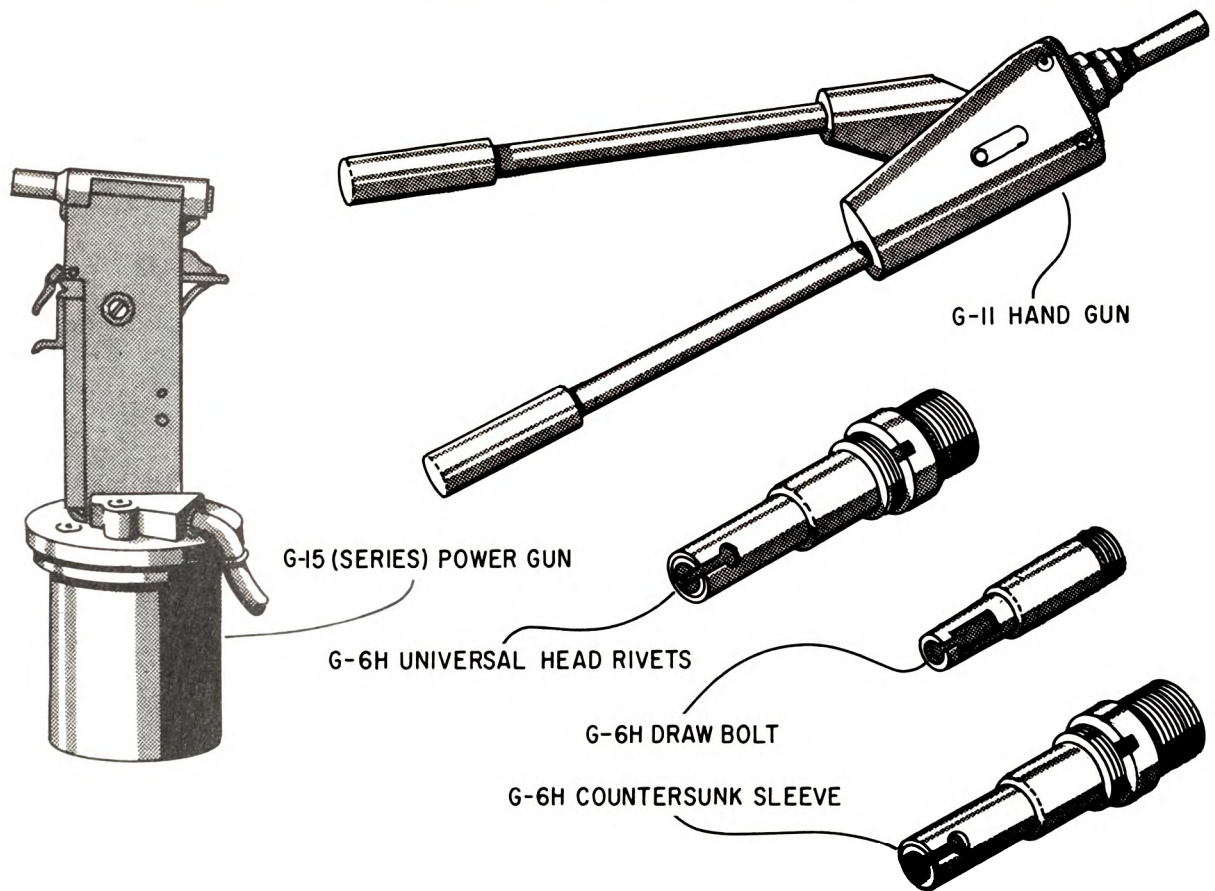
Self-plugging rivet (friction lock) installation tools.
